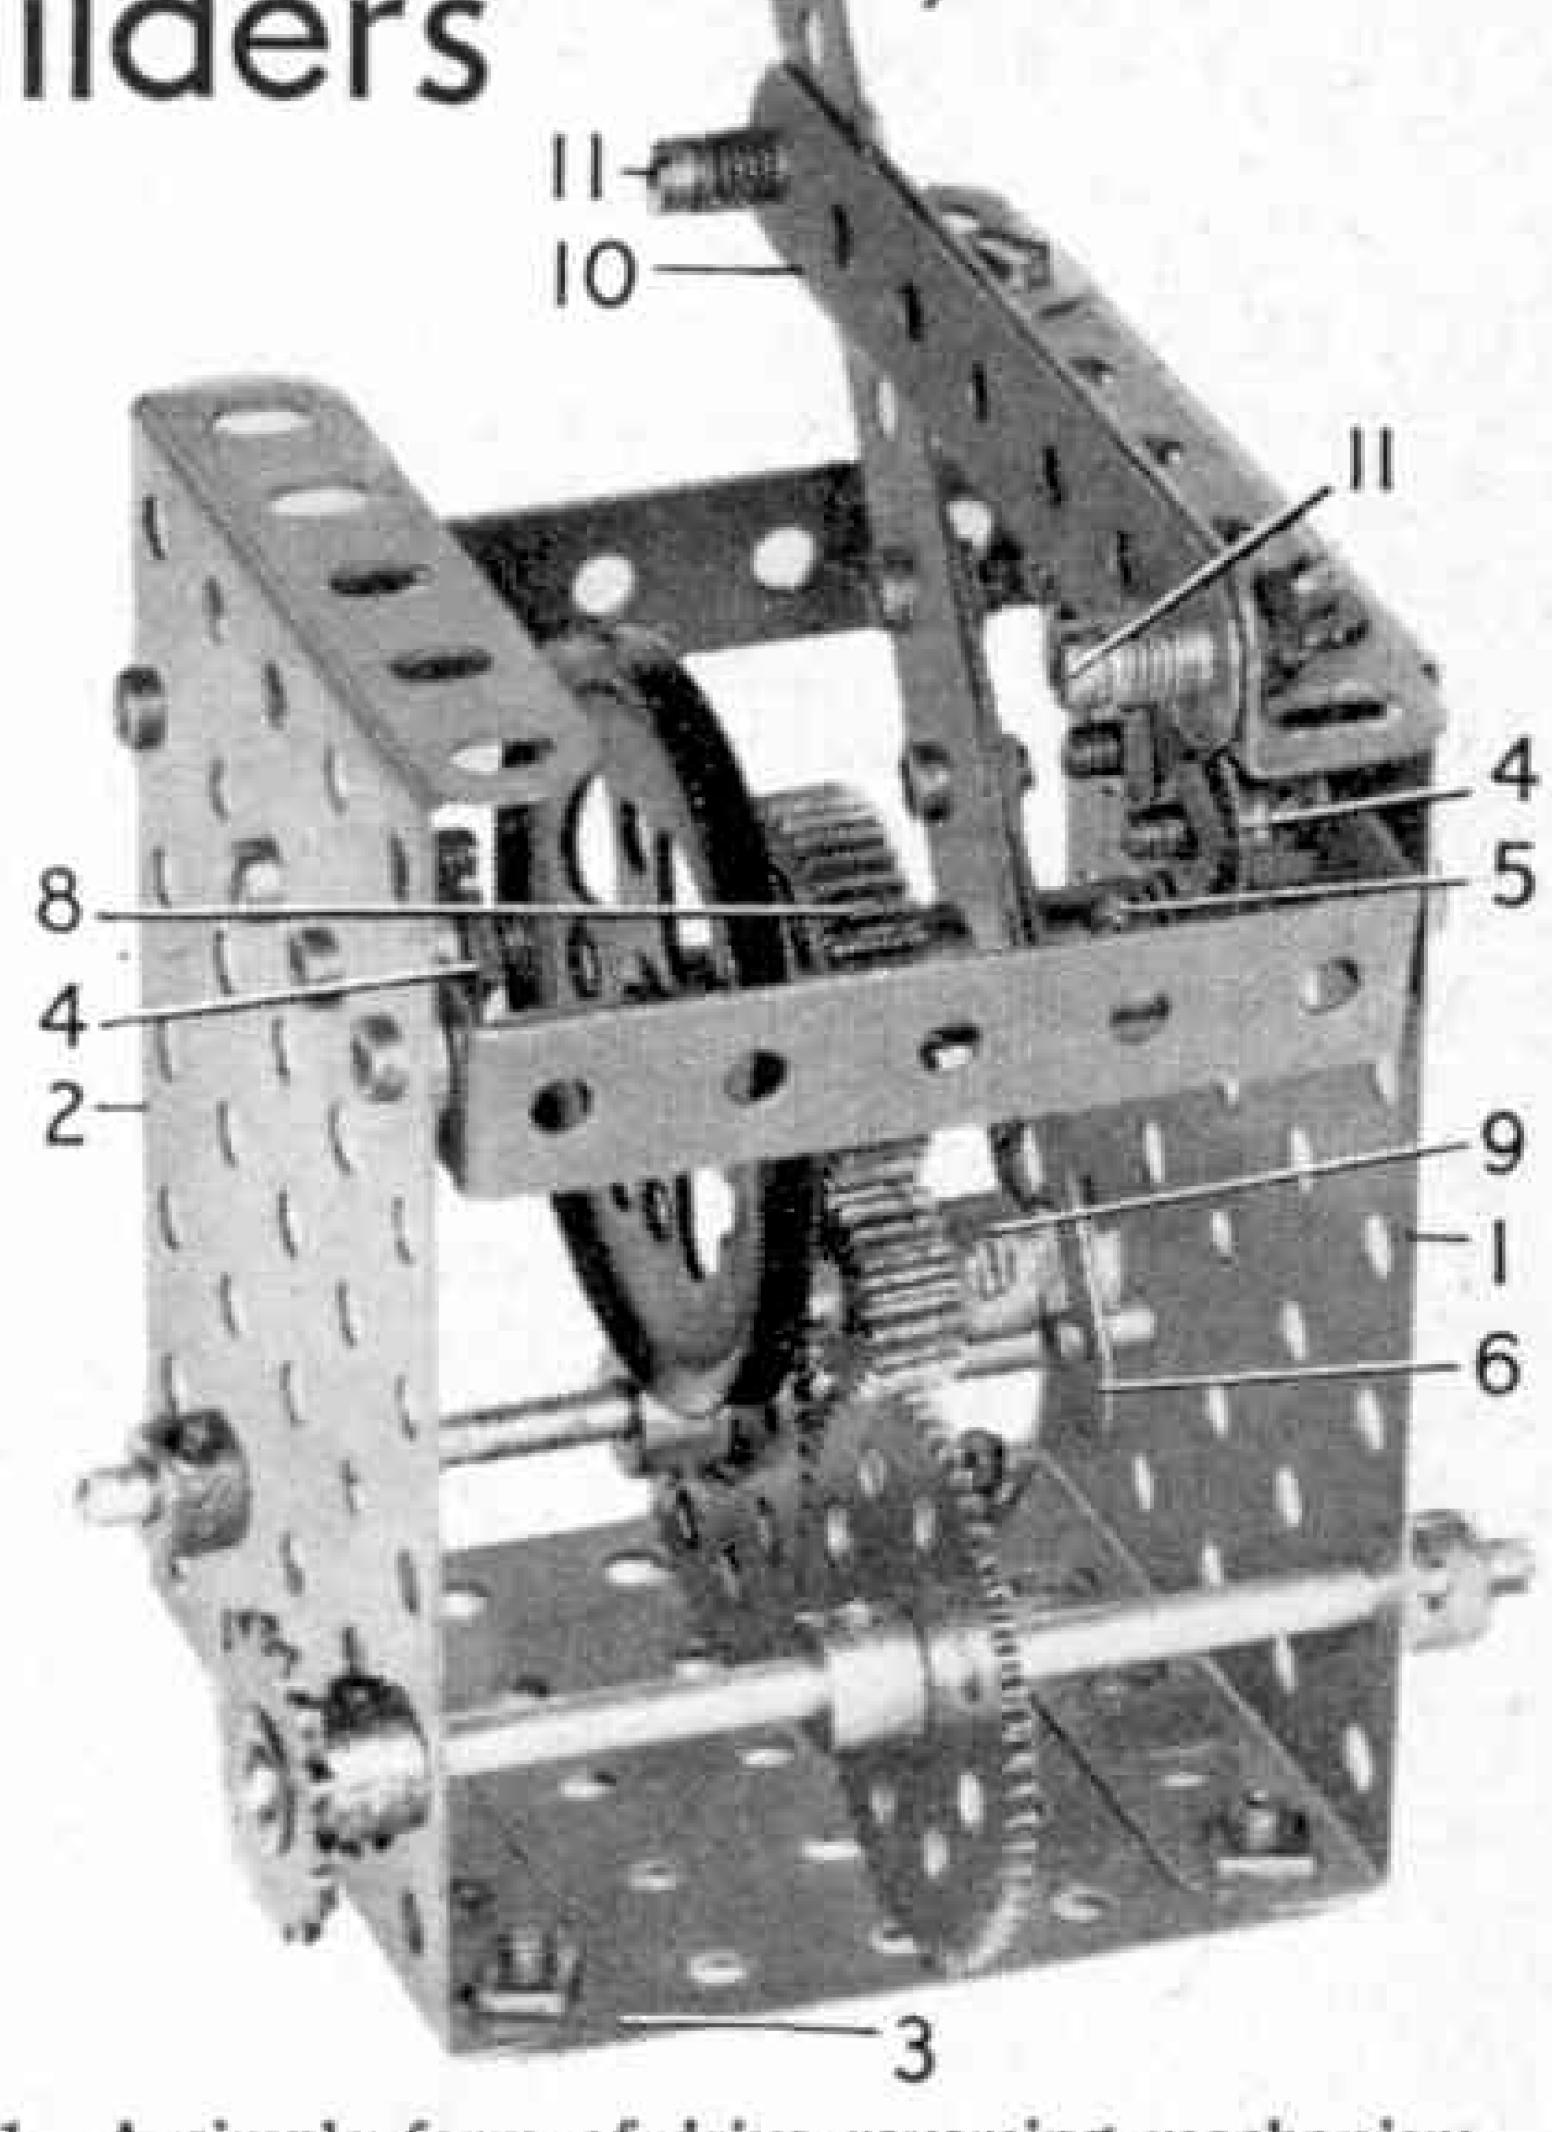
A simple form of drive reversing mechanism designed by H. H. Taylor, Huddersfield.
